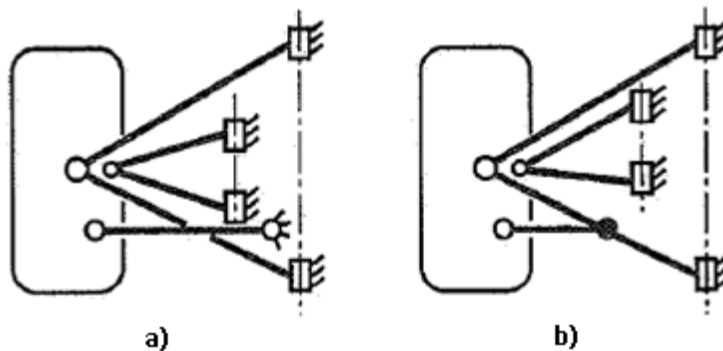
Tie rod link at rear suspension connected a) to the chassis; b) to the wishbone [2]
